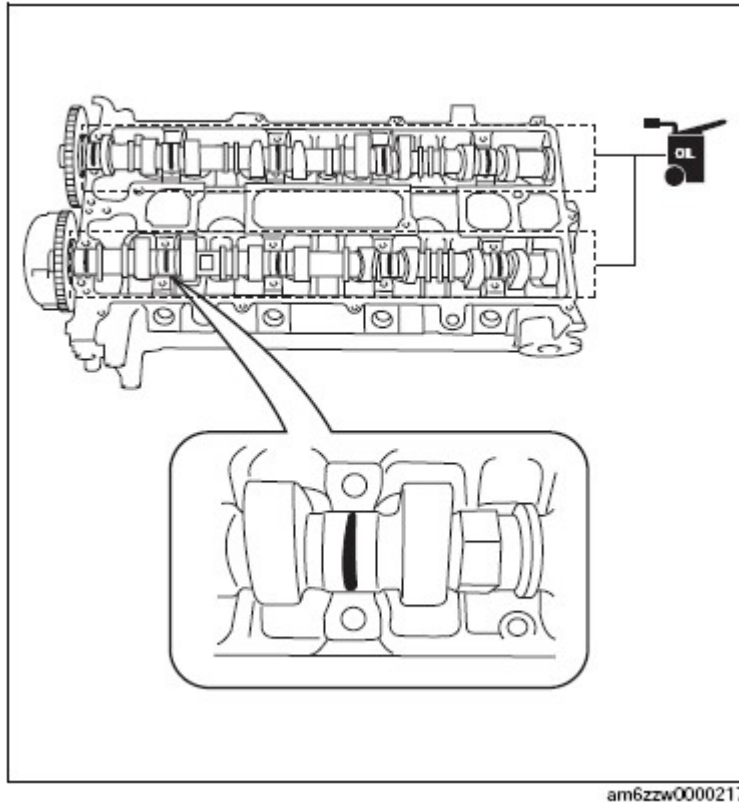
Applying Gear Oil (SAE No.90 Or Equivalent) To Each Journal Of Camshaft
